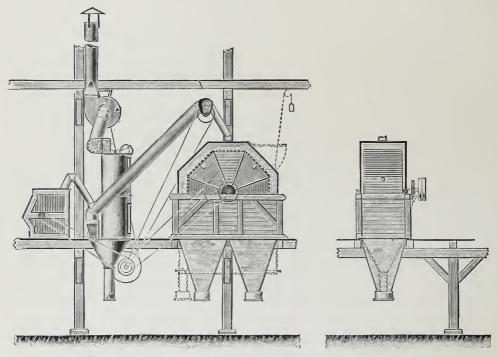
Complete Sack-Cleaning Plant, with Dust Collector.
